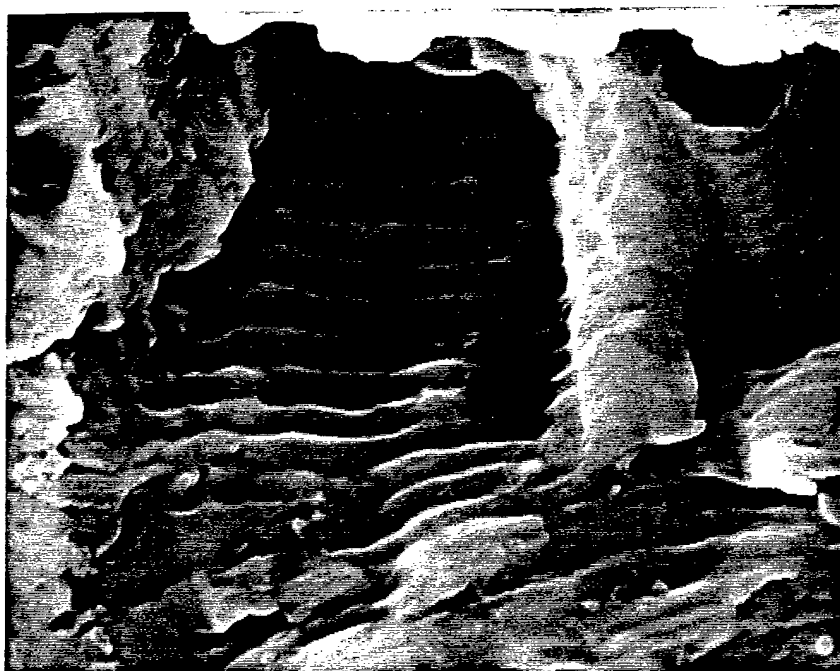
Striations Noted Within the Fracture Surface of PUR Rod -174 (Mag. 10kx).
